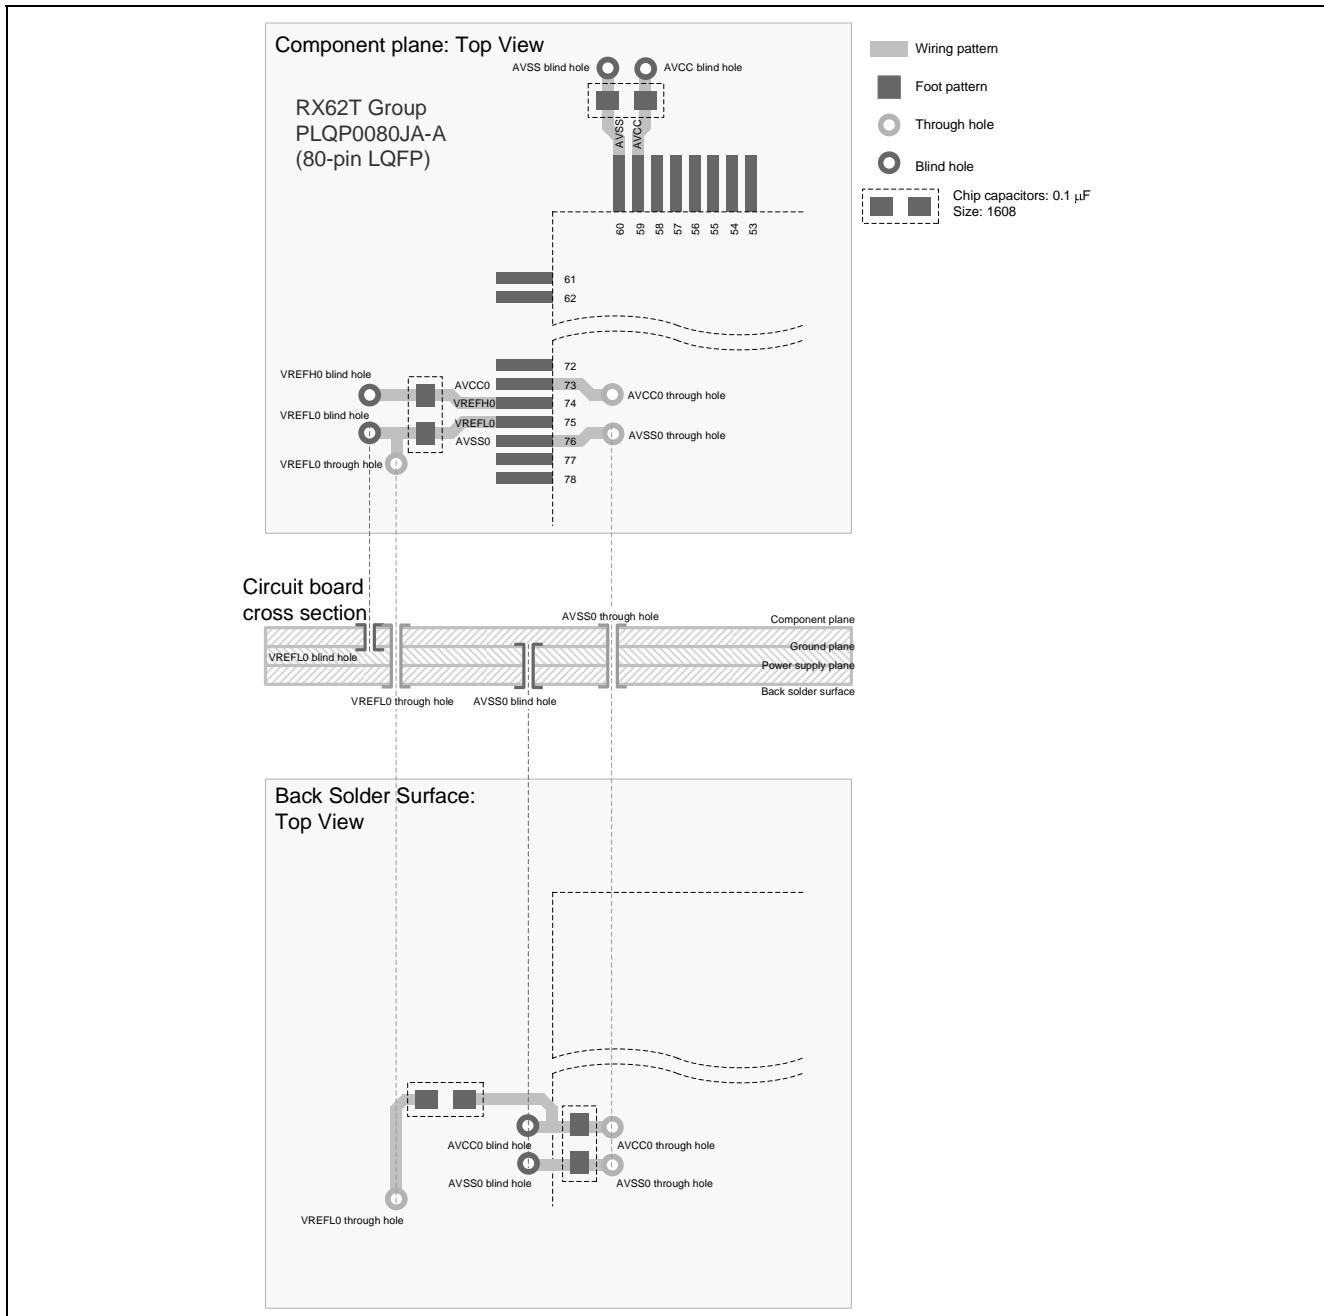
RX62T 80-Pin LQFP Package Power Supply Pin Capacitor Layout Example
